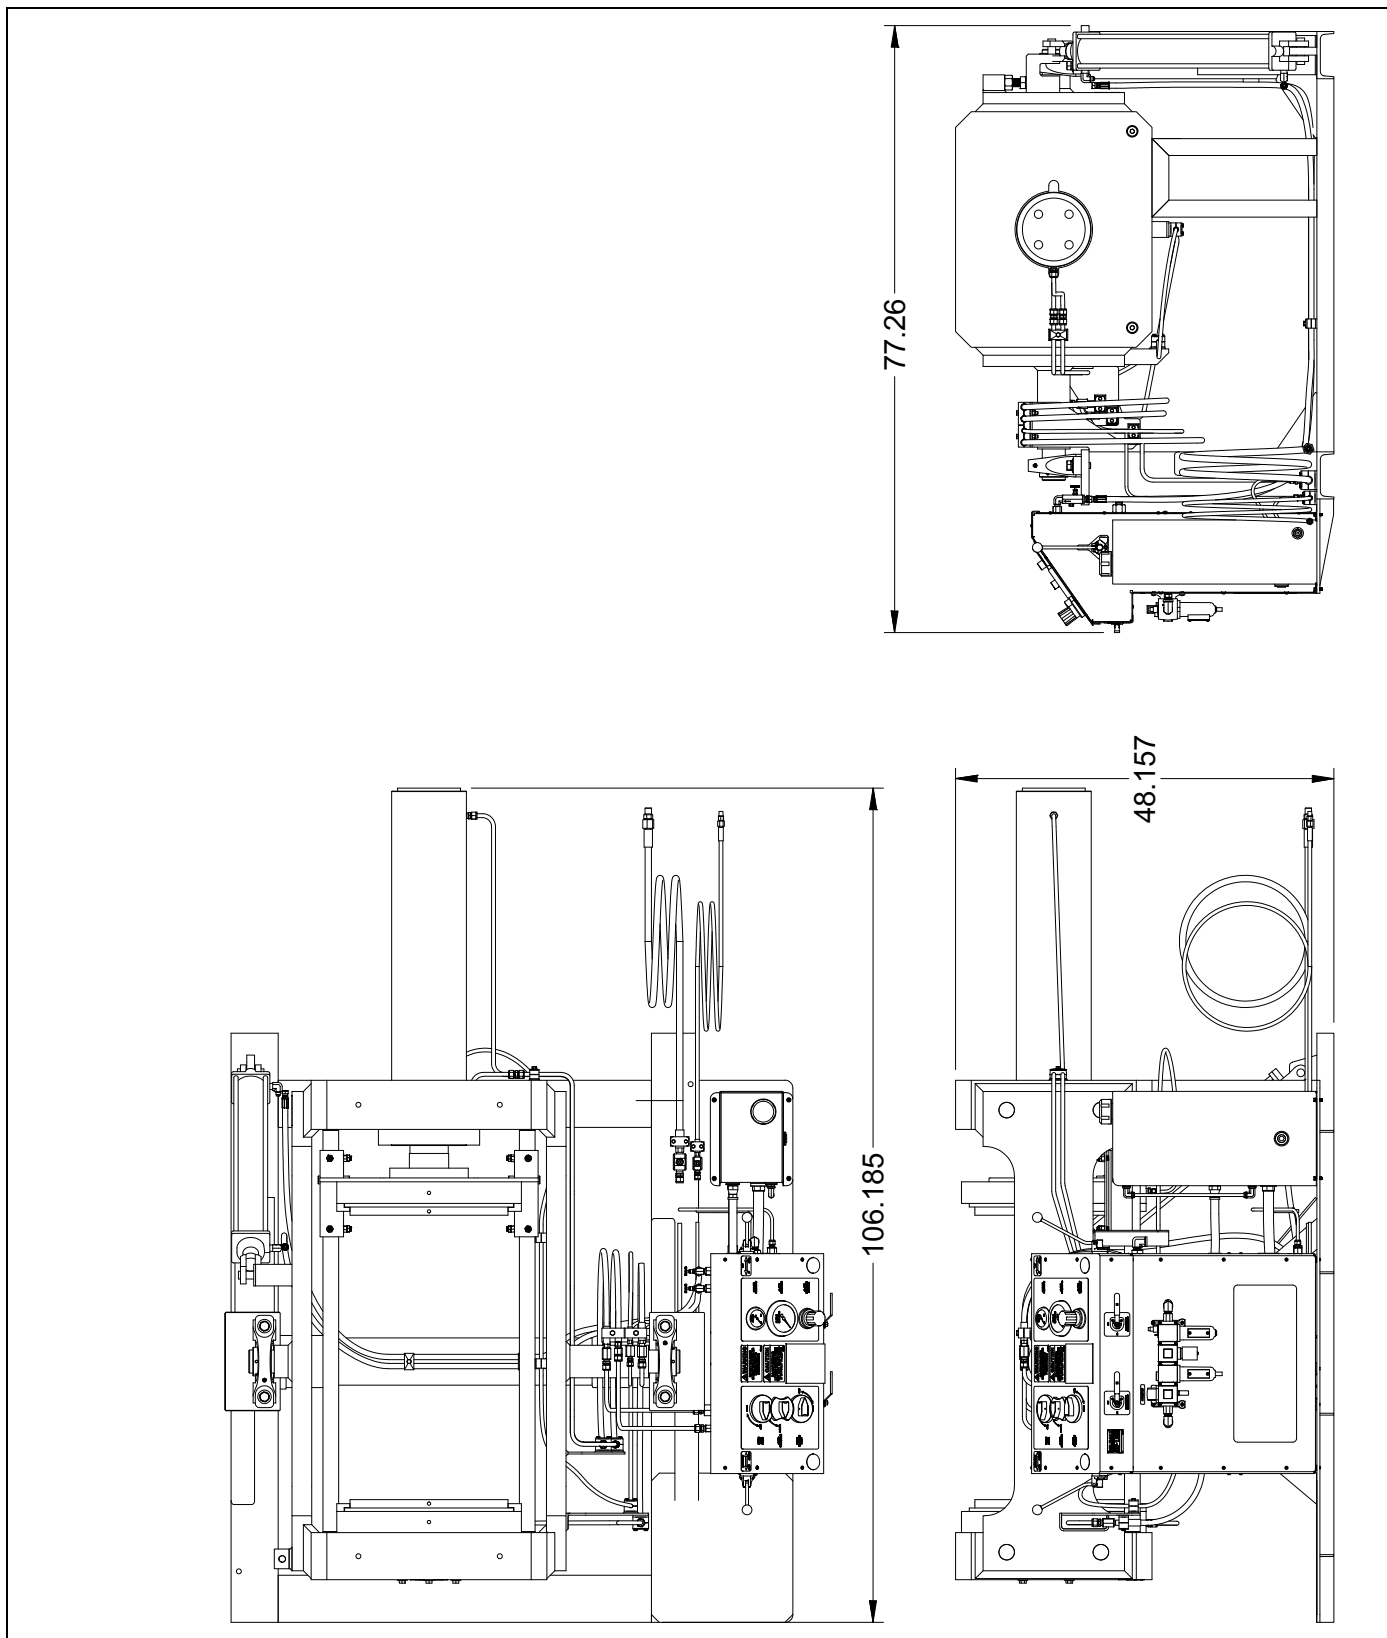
CLAMP FIXTURE DIMENSIONS
